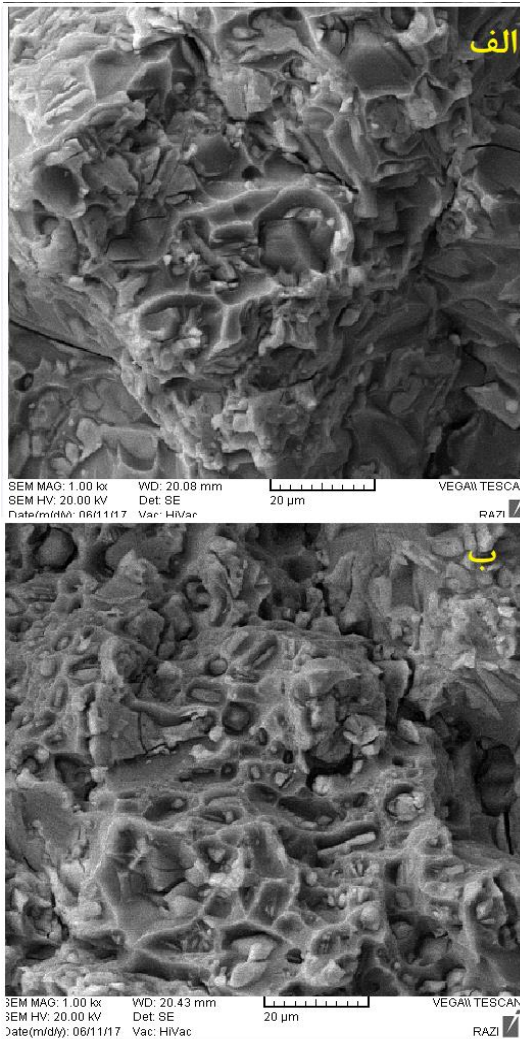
The fracture surface of samples A- base and B- 4 passes after the friction stir welding process.
